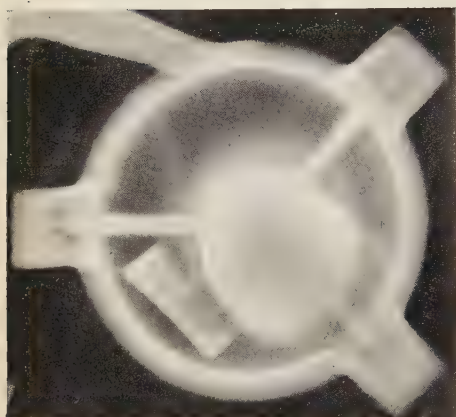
Radiograph of Defective Cap Casting, showing unsoundness. $\times \frac{1}{6}$.
